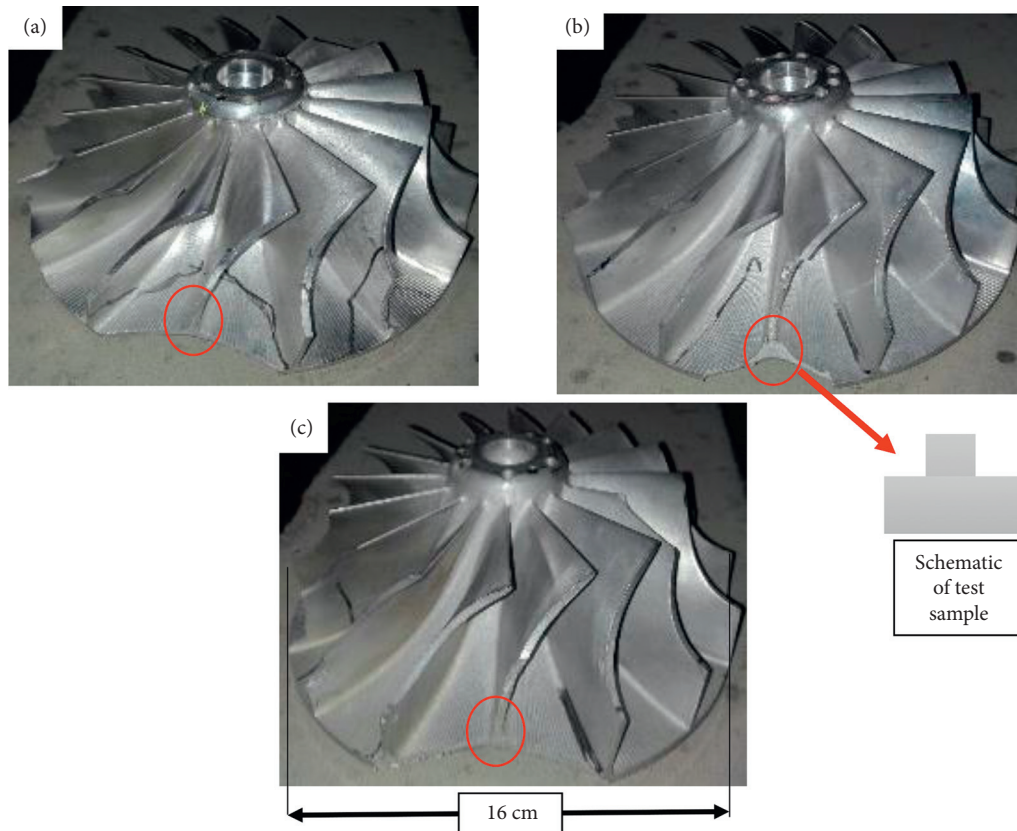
Three fractured impellers and schematic of test sample for (a) sample 1 (b) sample 2 (c) sample 3.
